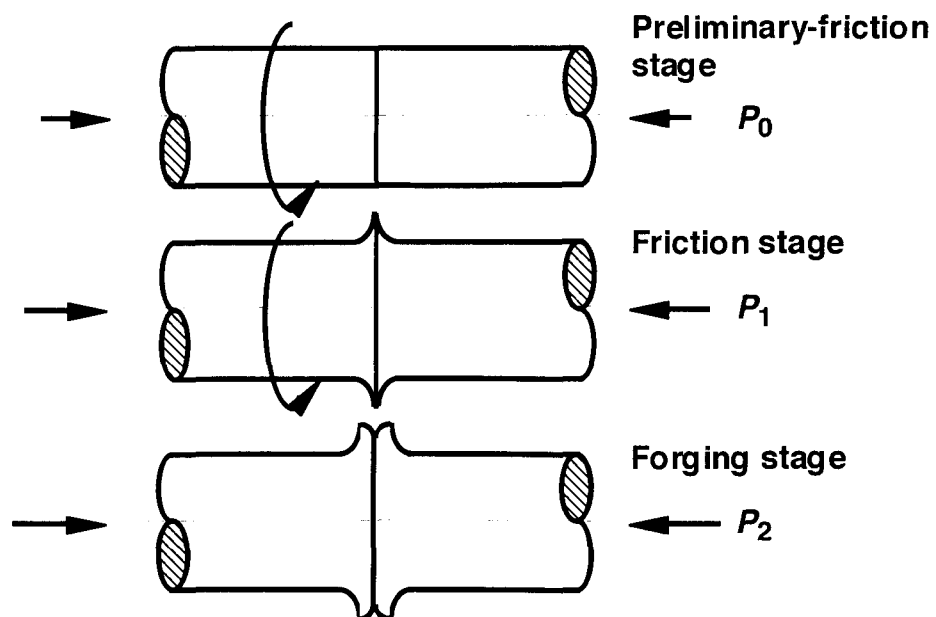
Schematic diagram of friction welding process.
